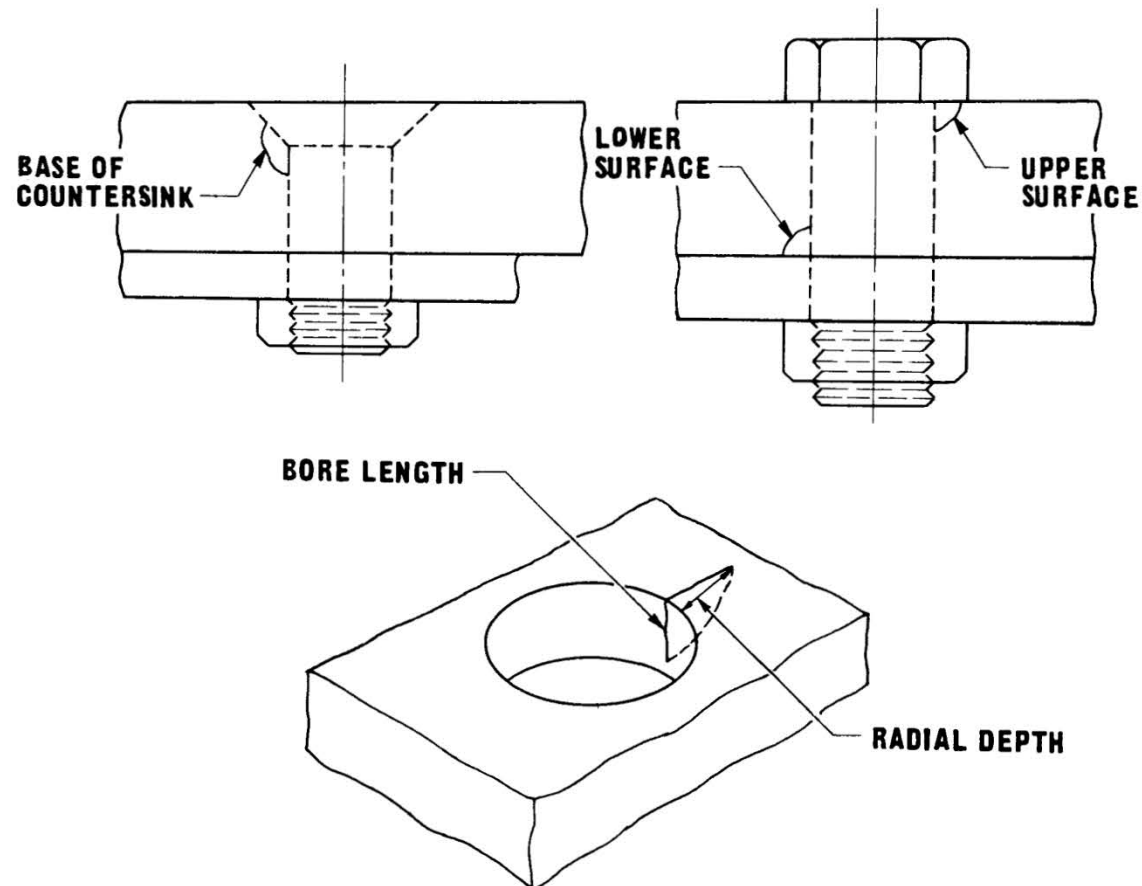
Geometry of crack flaws in fastener systems.
